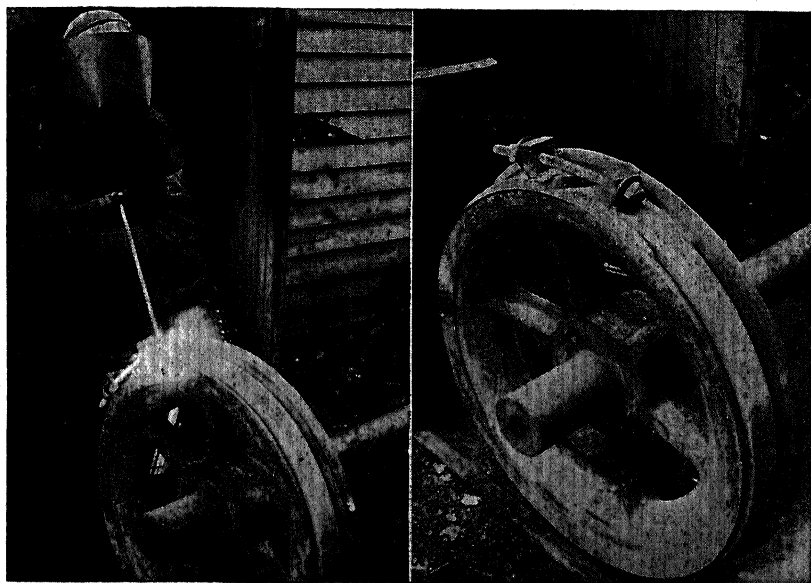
Building up worn locomotive tires. High carbon steel filler band is heated red hot, bent around the wheel and tightened by a clamping bolt as shown in inset. Tire is then built flush with shielded arc mild steel electrode. Average time per wheel is $2\frac{1}{2}$ hours. Service of repaired wheels equals service of new wheels.
